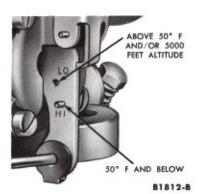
Six Cylinder Carburetor Accelerating Pump Lever Adjustment
